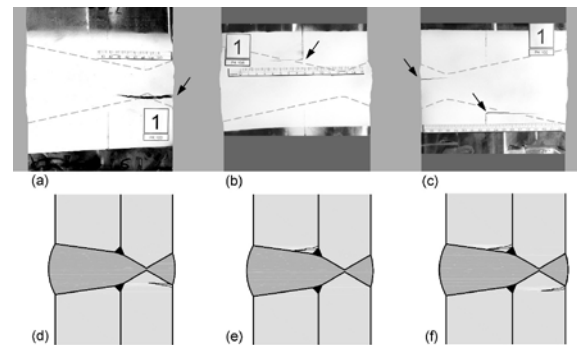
Failure of the specimens No. (a) 103, (b) 106, (c) 102; (d) Crack starting from weld toe, (e) Crack starting from the end groove weld, (f) mixed crack mode.
